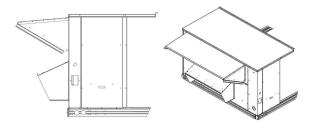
Installed Barometric Hood Side View and Isometric View
